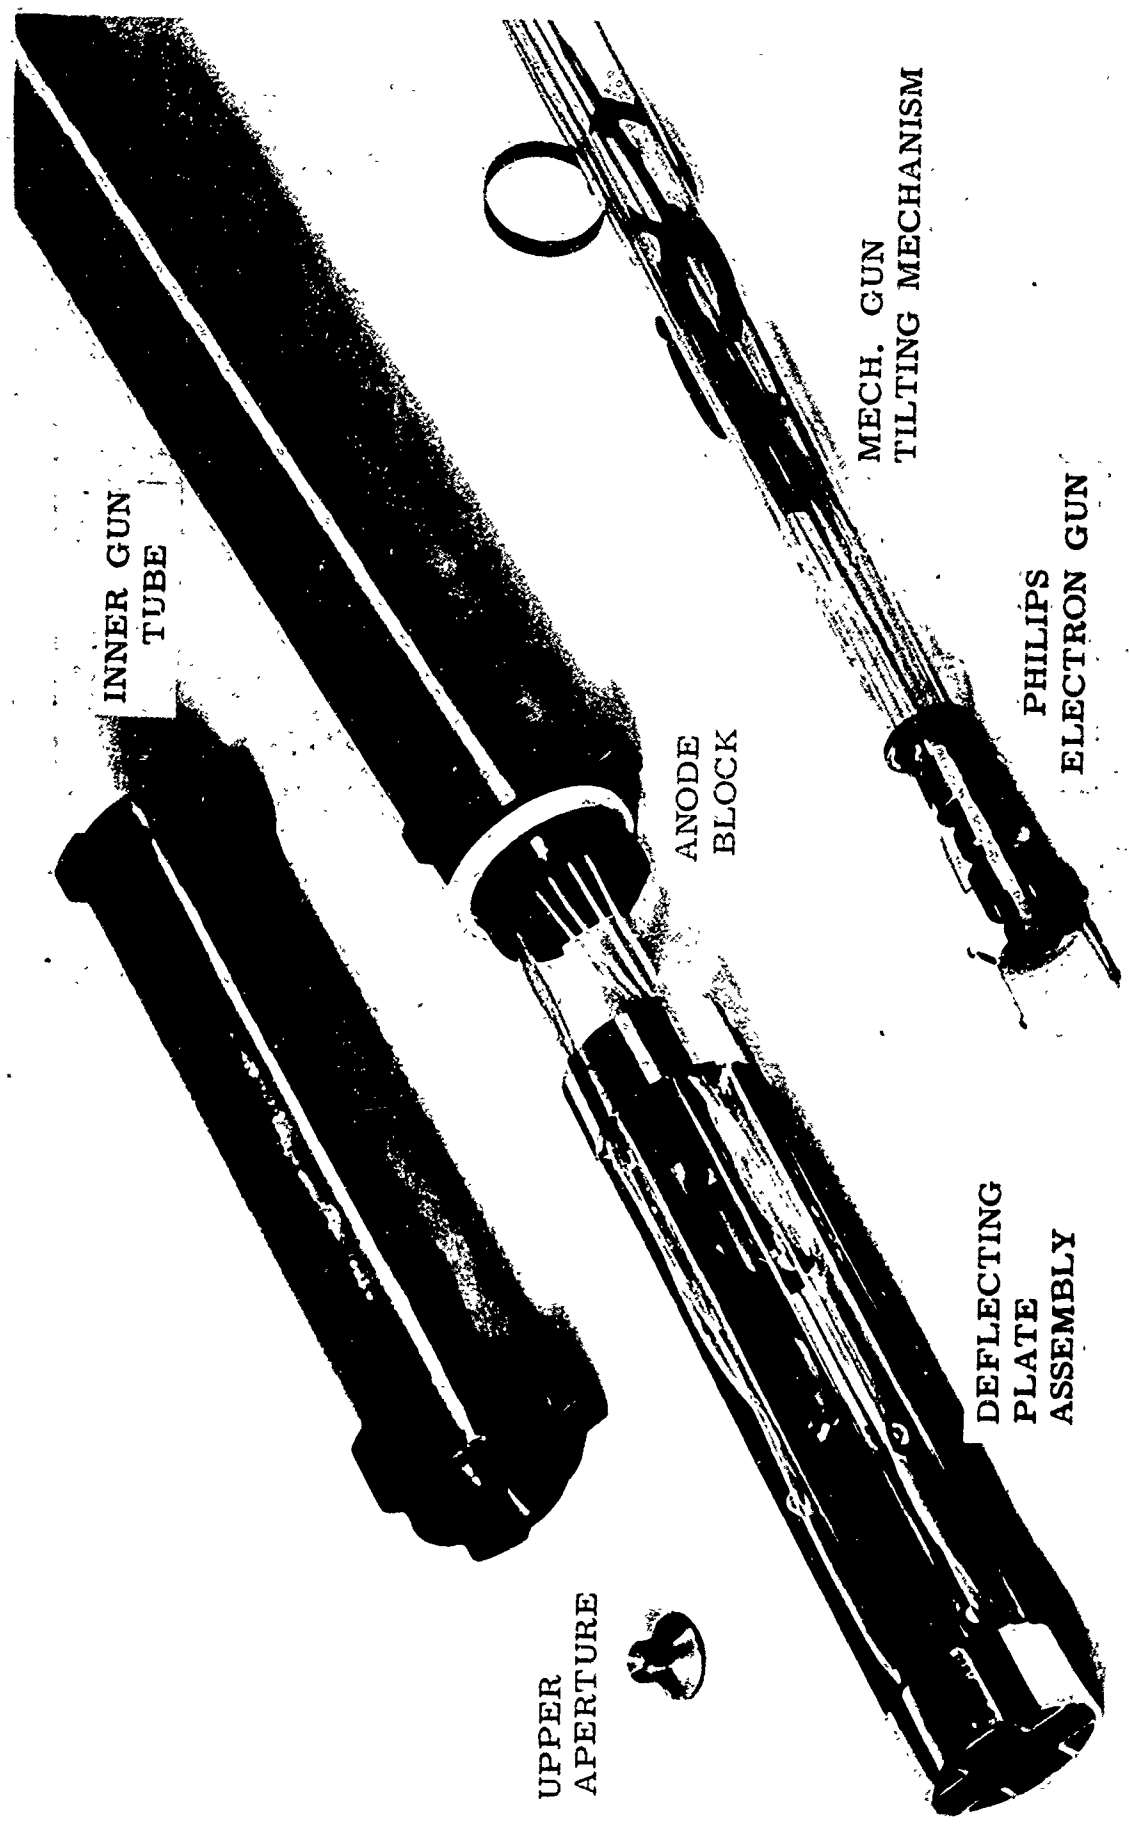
DEFLECTING PLATE ASSEMBLY AND INNER GUN CHAMBER
